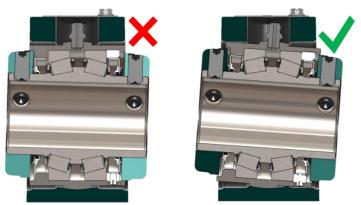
Misaligned tapered roller bearing (left) and aligned tapered roller bearing (right)
